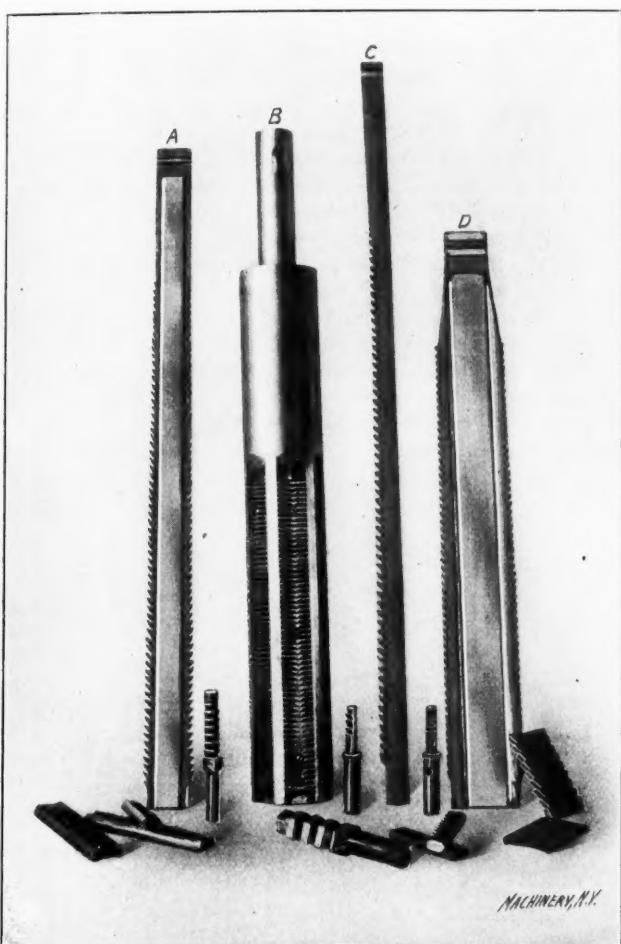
Some of the Broaches used for Broaching Motor Parts.
